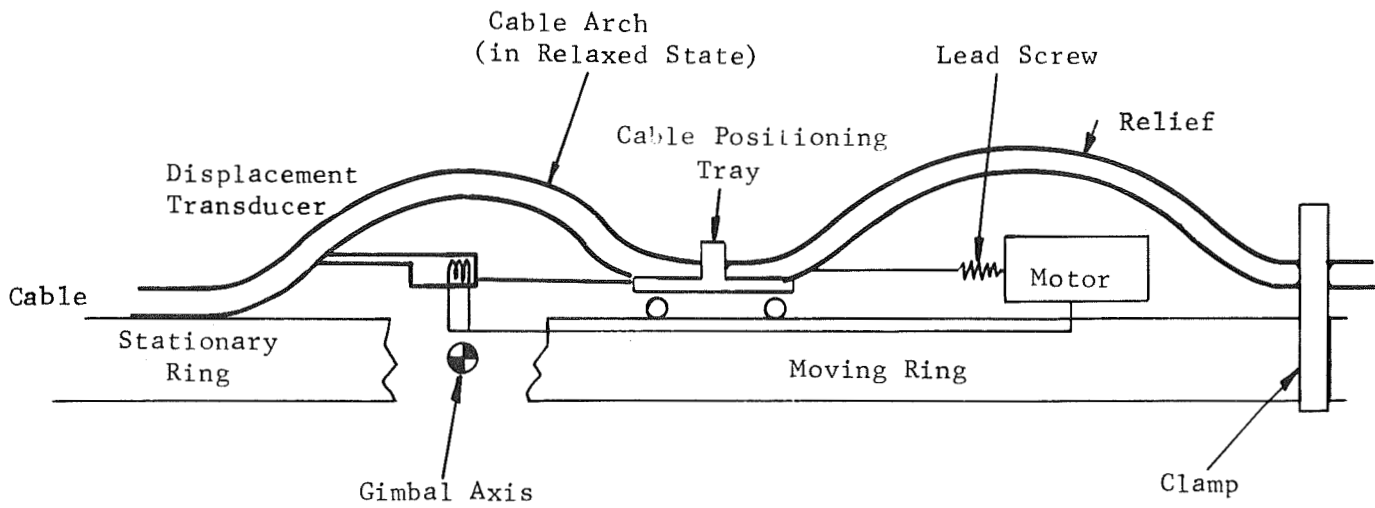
Techniques for Low-torque Axis Crossing For Cables
